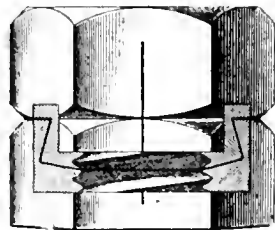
SECTIONAL VIEW OF THE VISLOCK NUT.
